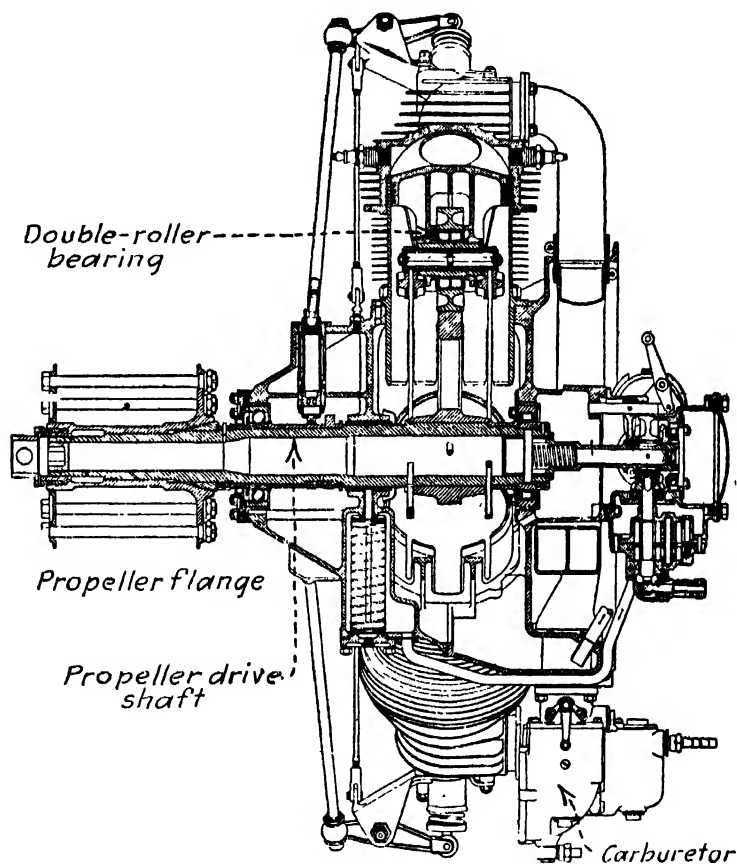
Side Section Elevation Drawing of the Caminez Engine Showing Simplicity of Valve Gear and Piston Arrangement.
